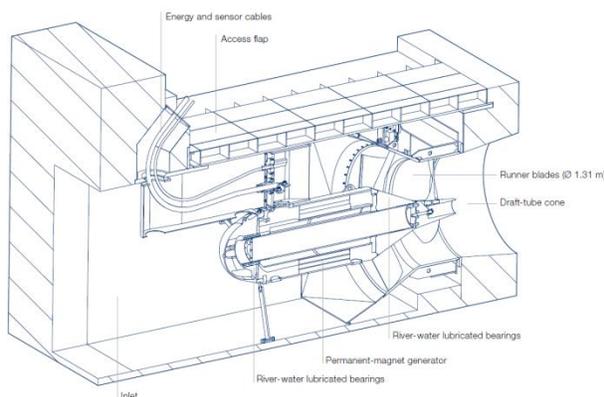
Sectional drawing of the StreamDiver® unit in installation position at Nussdorf site
